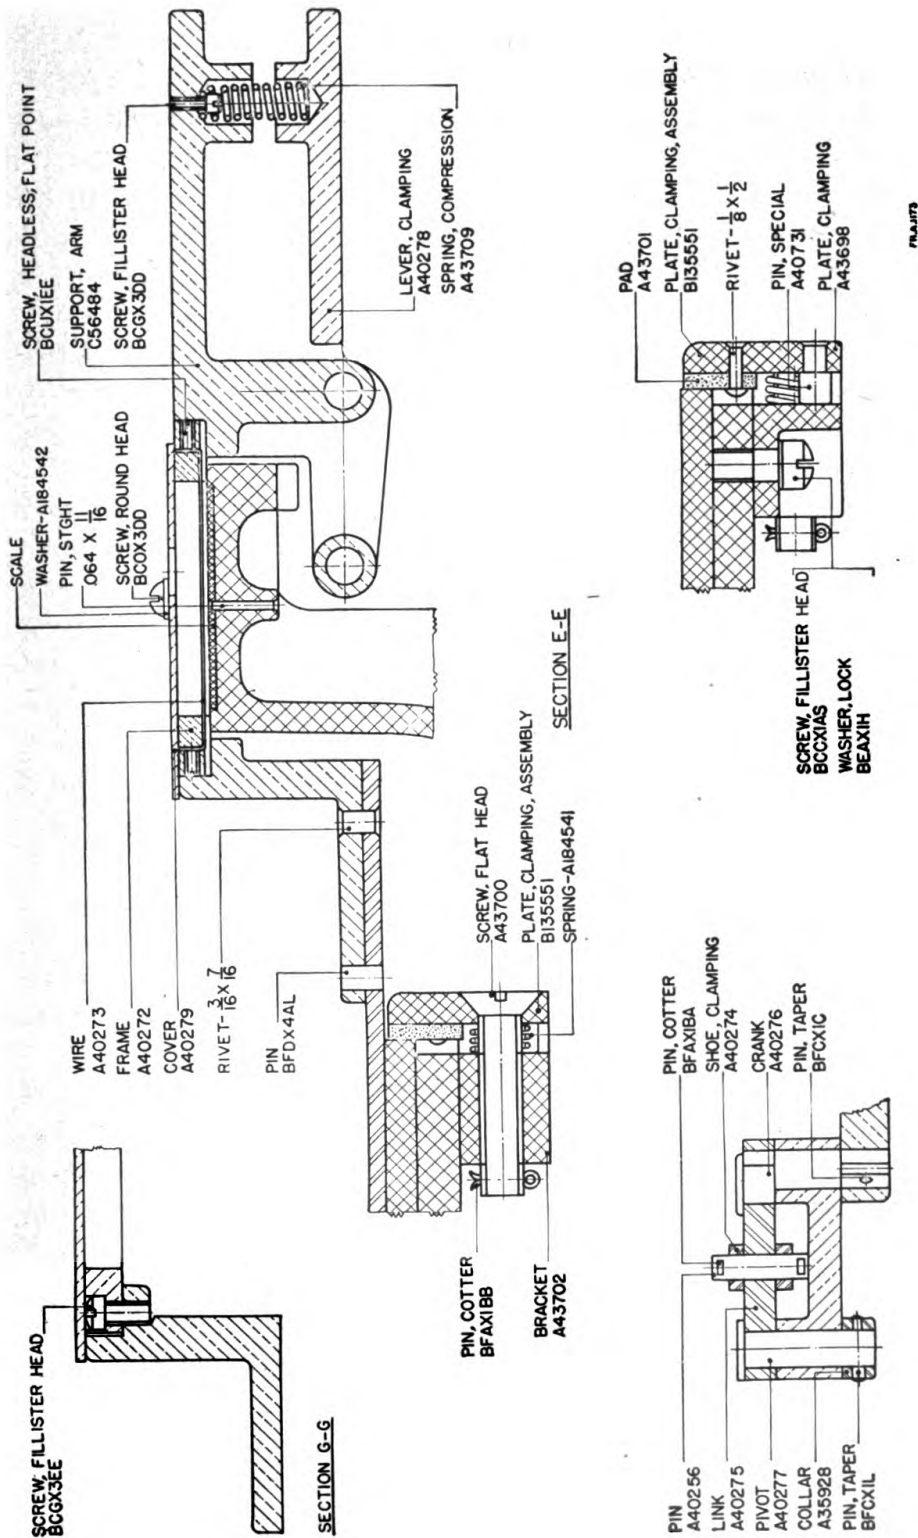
Sound ranging plotting board M1, sectional views.
